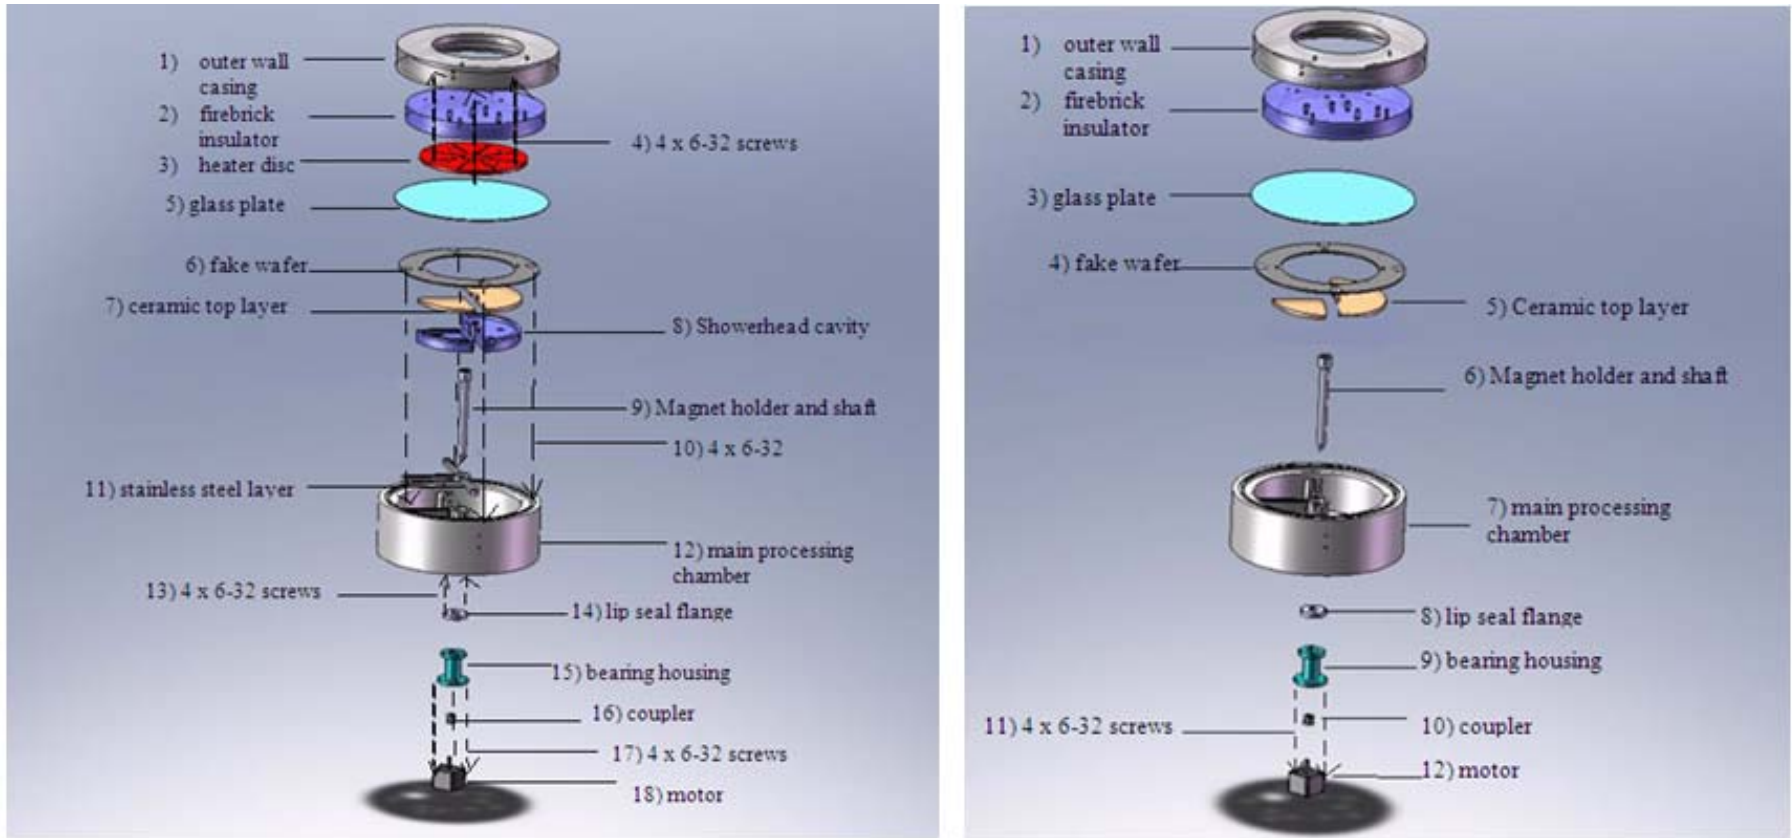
(a) Original assembly design and (b) Revised assembly design for continuous manufacturing of CNTs
